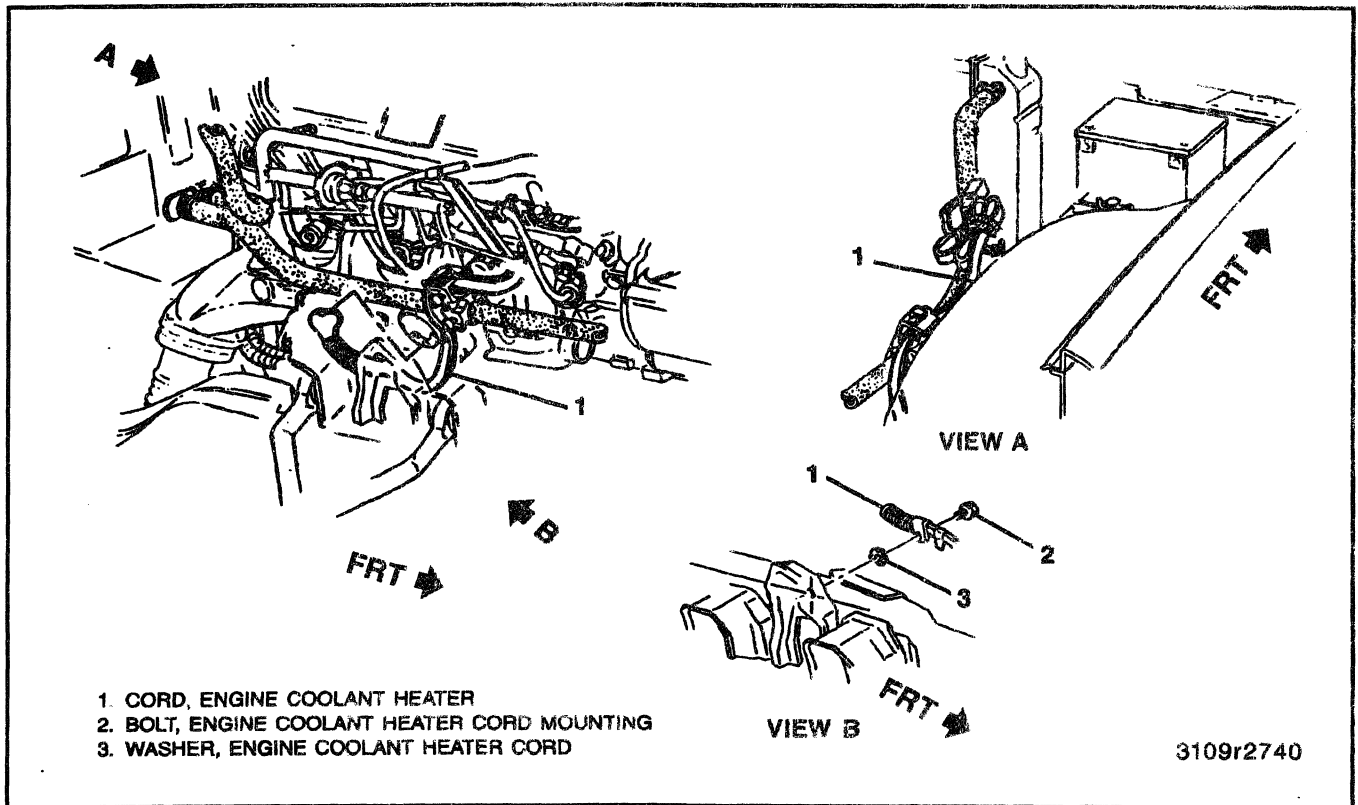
Engine Coolant Heater Cord Routing (Four-Wheel Drive Models with 7.4L Engine)
